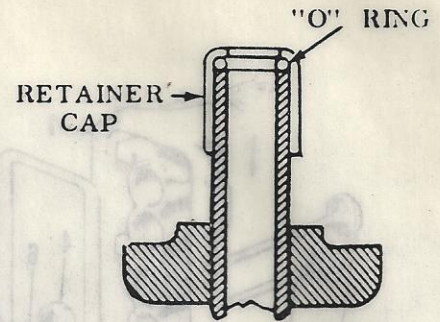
Cross section of valve guide showing installation of "O" ring stem seal and retainer. The "O" ring should have 0.020-0.060 clearance with retainer cap installed. Make certain that "O" ring is free and not compressed.
